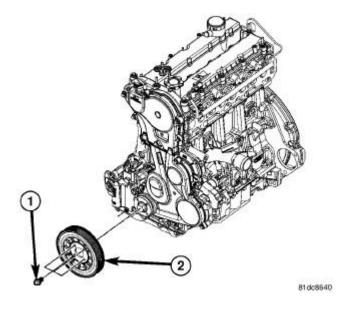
CRANKSHAFT DAMPER Courtesy of CHRYSLER LLC
